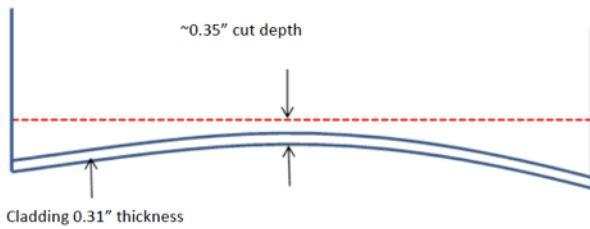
Sketch of cladding cut off from Segment 1 blocks [18]
